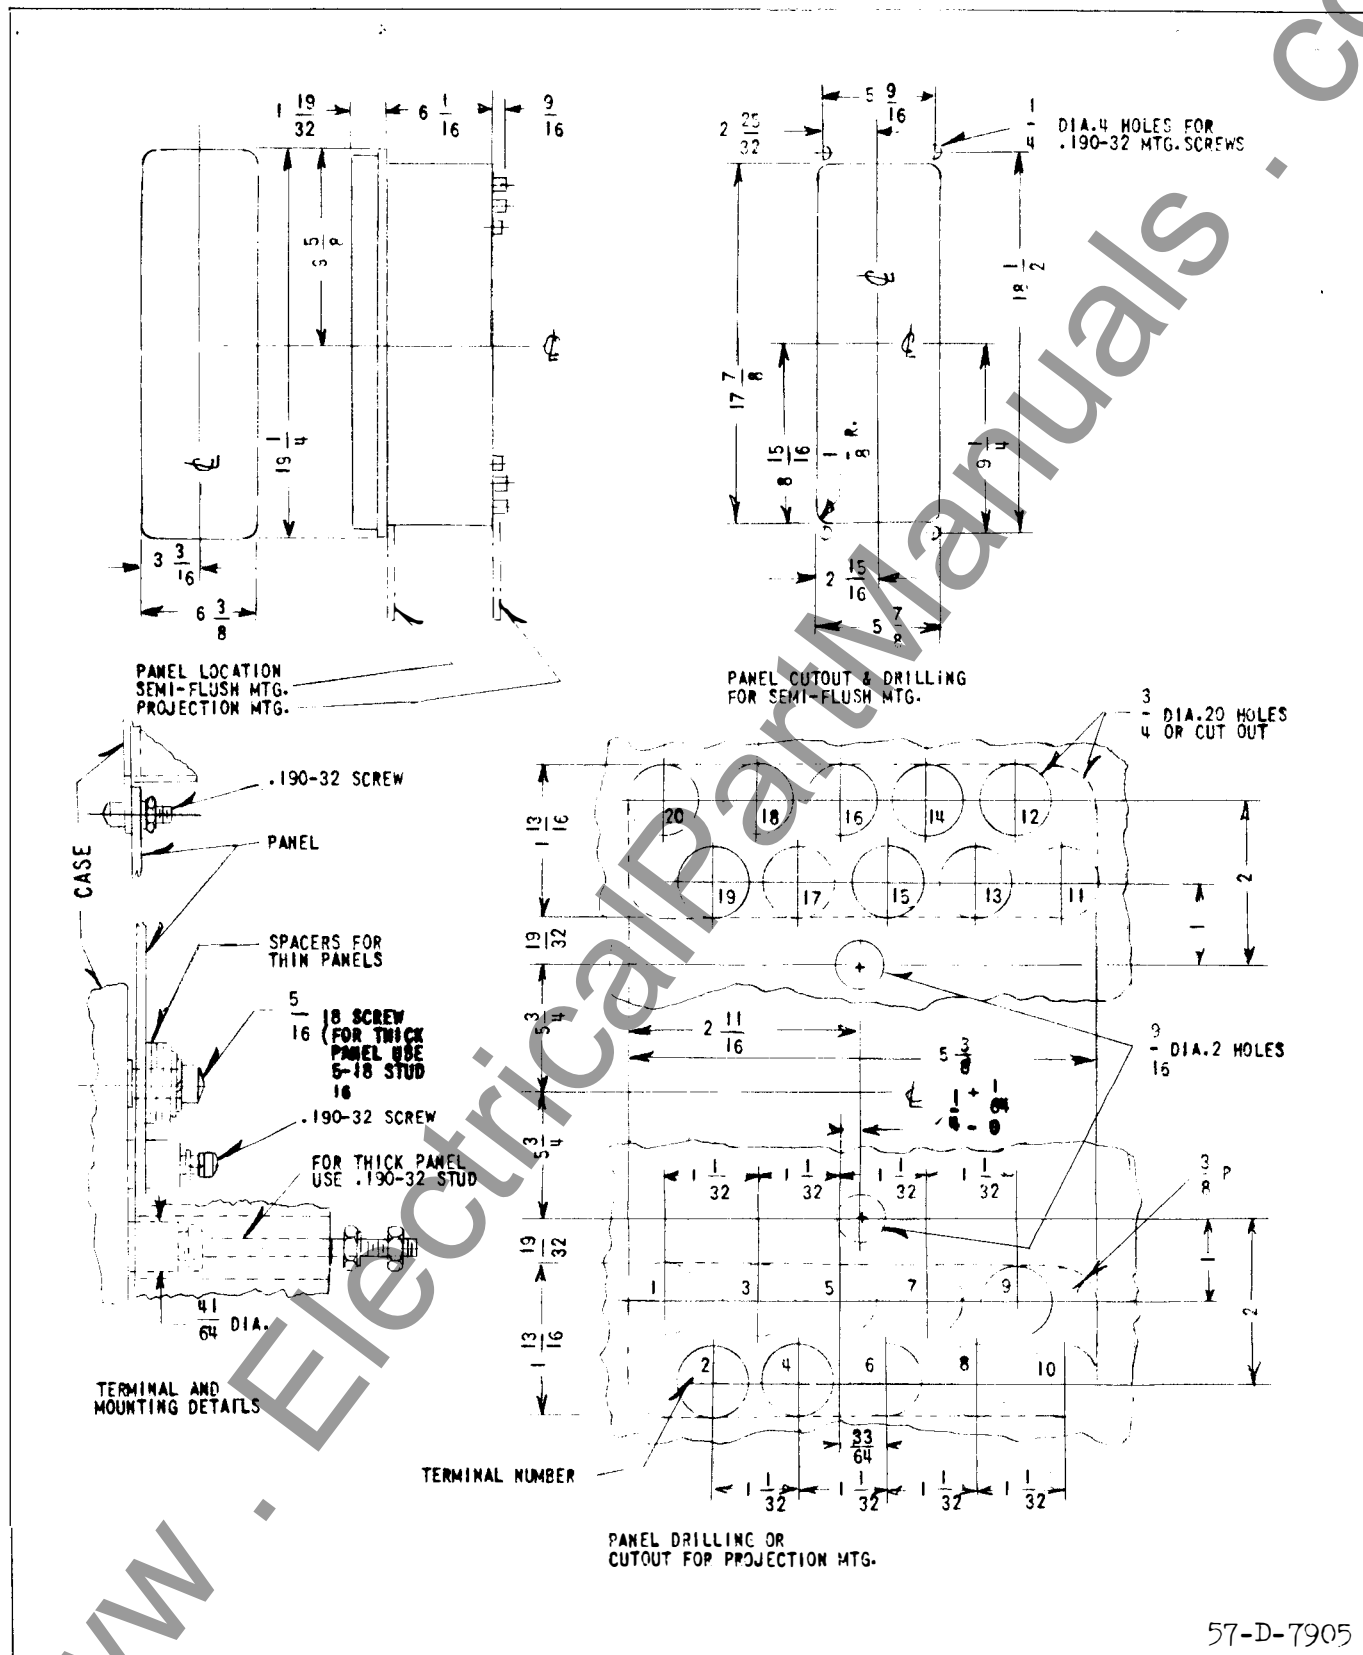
Outline and Drilling Plan for the Type FT41 Case
